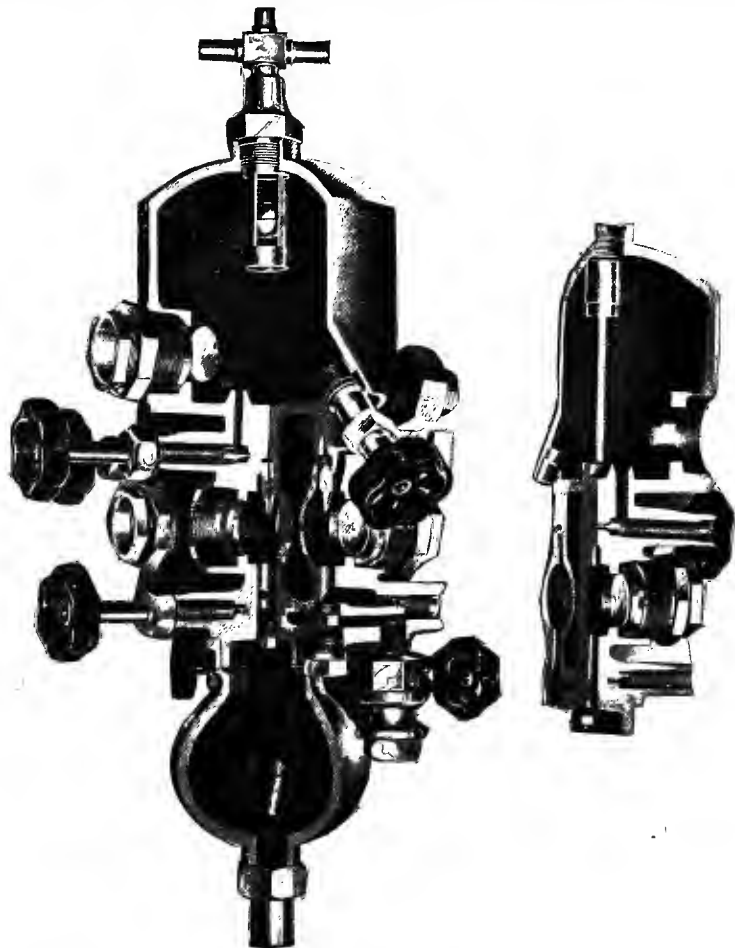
Sectional view of the Michigan Triple-feed Bull's-eye Locomotive Lubricator, made by The Michigan Lubricator Company.
